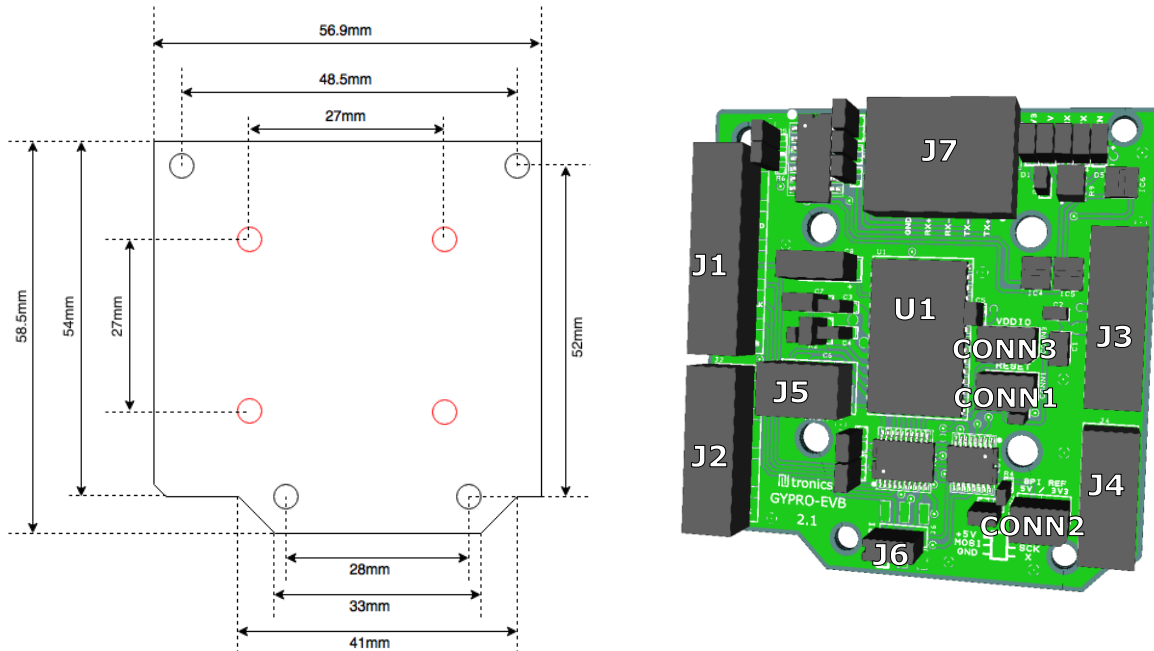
GYPRO®-EVB2 board (unpopulated) dimensions in millimeters with 3D top view
